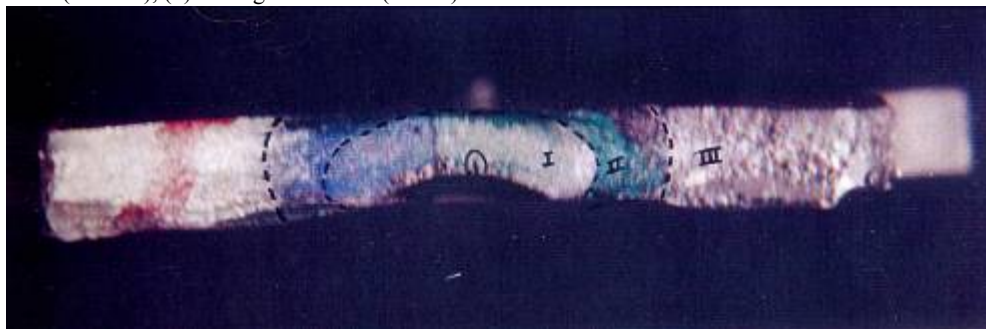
Fractograph of the specimen of the surface cracks for  $a/c=0.5$  and  $a/t=0.2$
